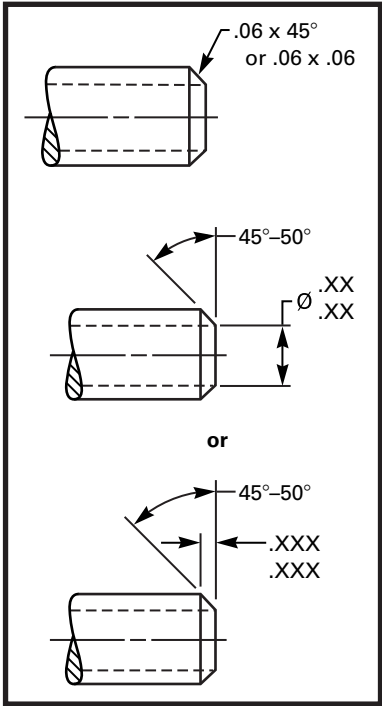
SPECIFYING EXTERNAL CHAMFER
